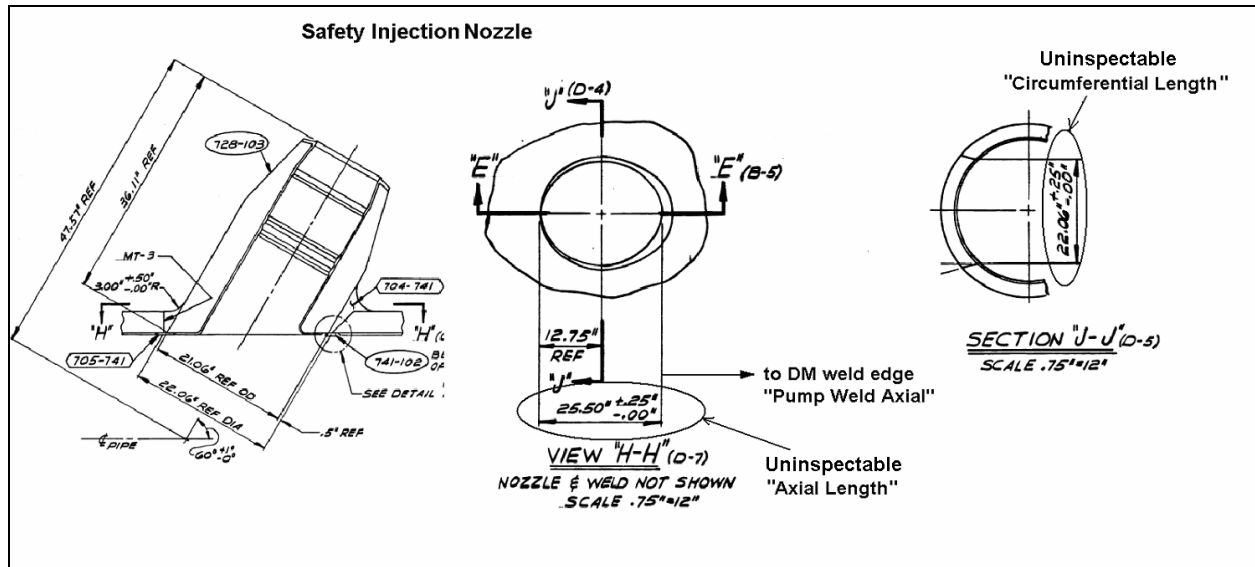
Sample Safety Injection Nozzle Uninspectable and Obstruction Dimensions
